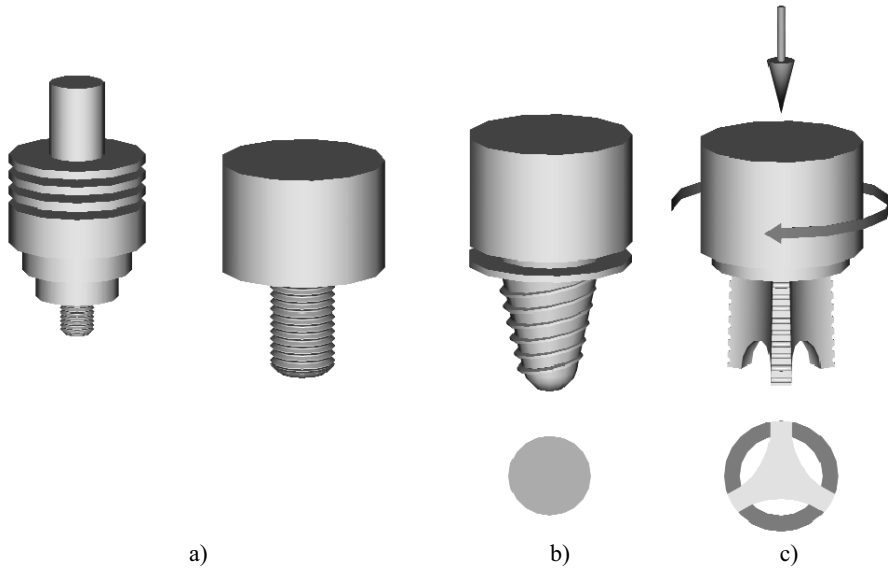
Friction stir welding probes. Cylindrical threaded pin probe – a; oval shape Whorl probe - b; flared-triflute probe – c
